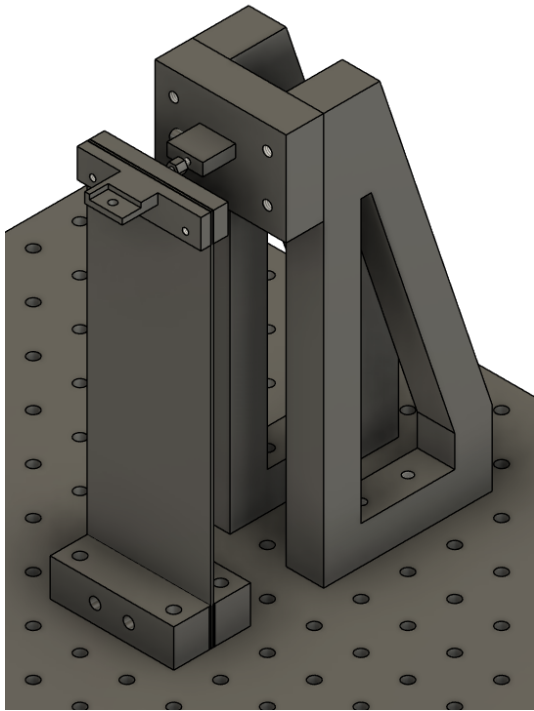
Machine drawing of RES2 S-beam Jr. load cell.
